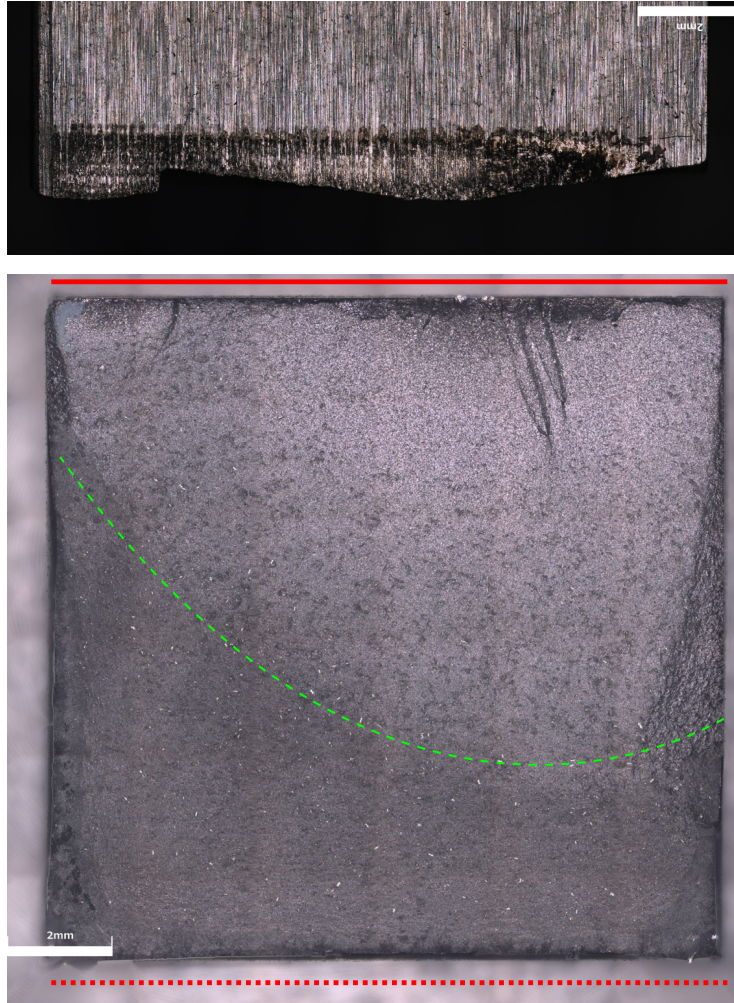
Fretting fatigue contact scar and fracture surface of a test for Inconel 718 at RT with cyclic contact normal load test (ff-in-rt-pv-04).
